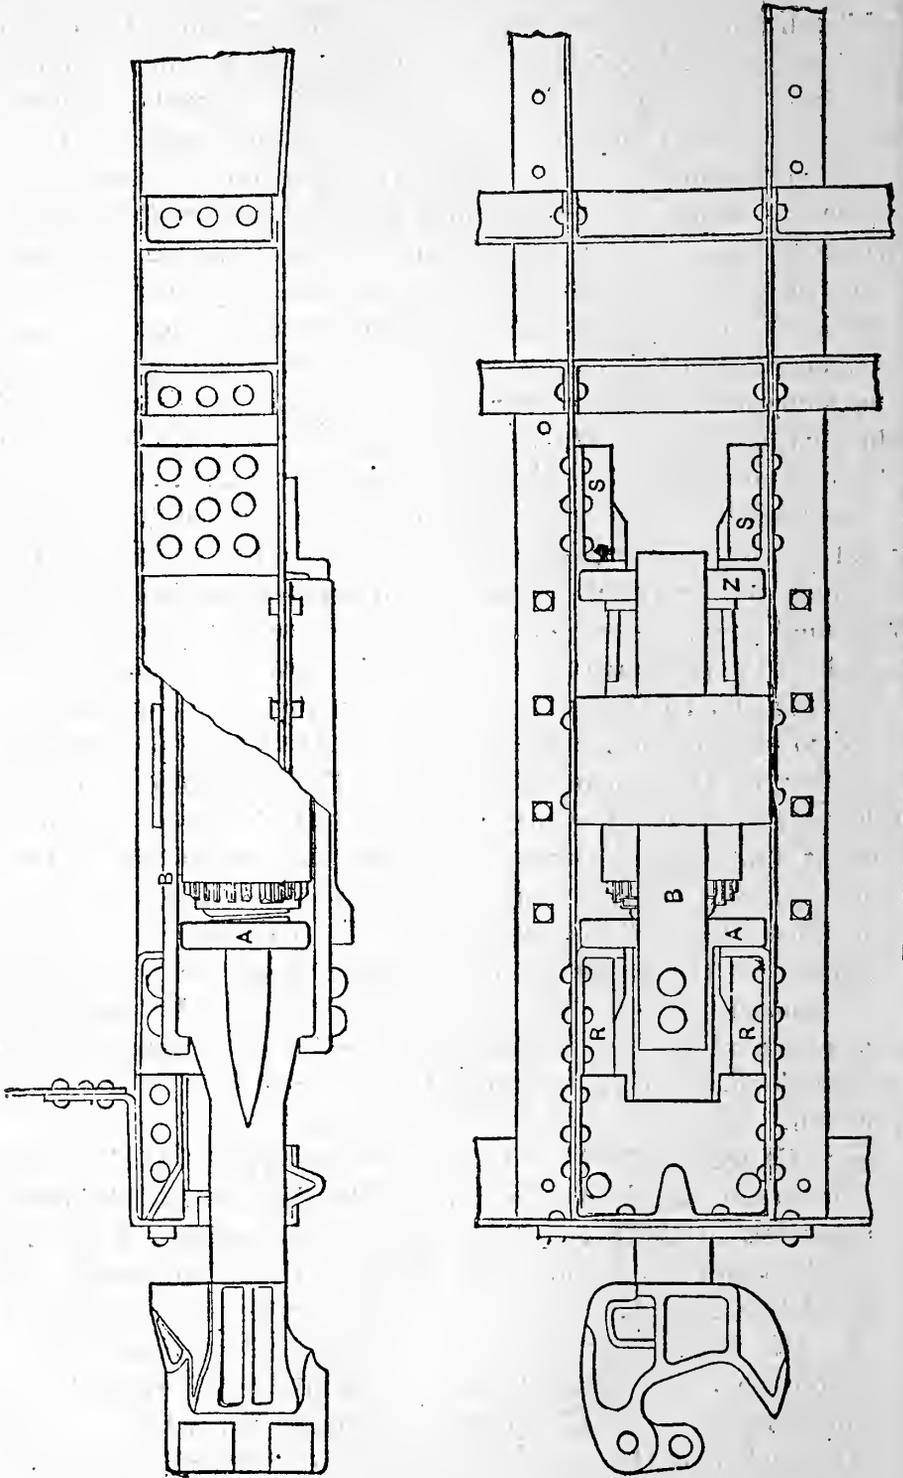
WESTINGHOUSE DRAFT GEAR.
